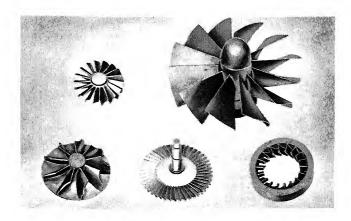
Parts produced by accurate casting methods. (Reprinted with permission of United Carbide International Co.)
